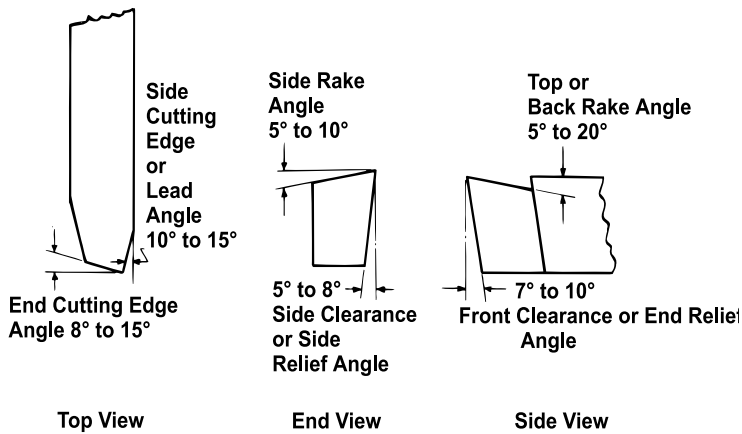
Suggested geometries for single-point turning tools used on stainless steels.
